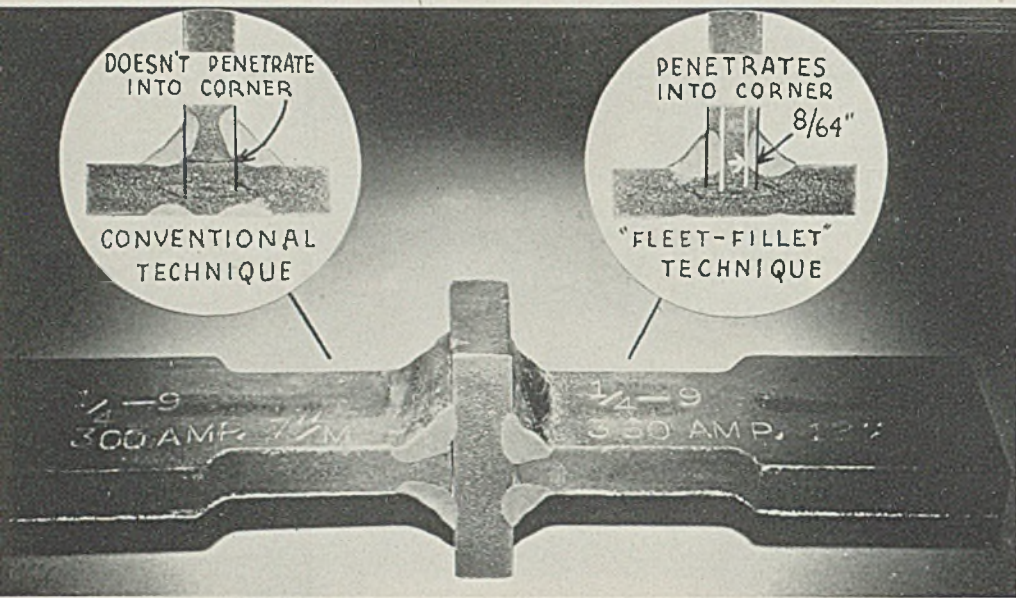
These two fillet welds shown in upper circles demonstrate the difference between conventional fillet welding and the Fleet Fillet technique. The latter specimens have only 70 per cent as much deposited metal in their cross section yet they are 15 per cent stronger. Large illustration shows how specimens were set up for the welding
